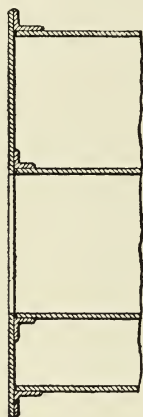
ATTACHMENT OF FRONT-END PLATE.
